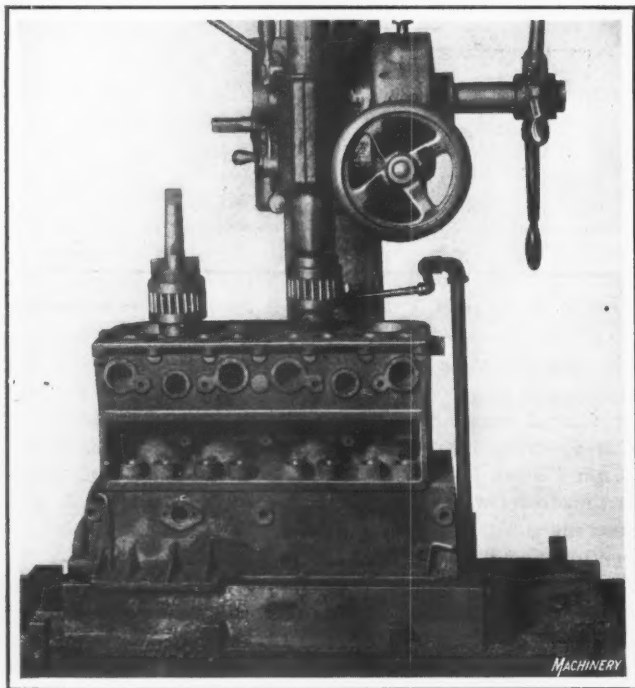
Finishing the Cylinder Bores of an Automobile Engine by the Use of a Rotating Tool having Twenty-one Rollers
